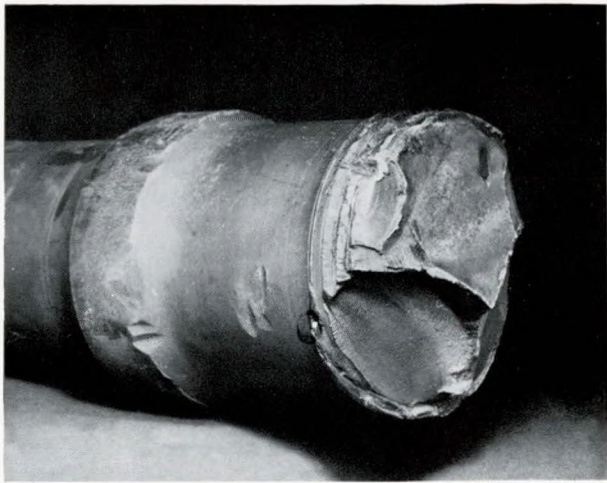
(top left)—Section through 3-in. specimen showing compound fracture (complete failure after 1,890,000 cycles, 3.0 to 10.3 tons per sq. in.)
